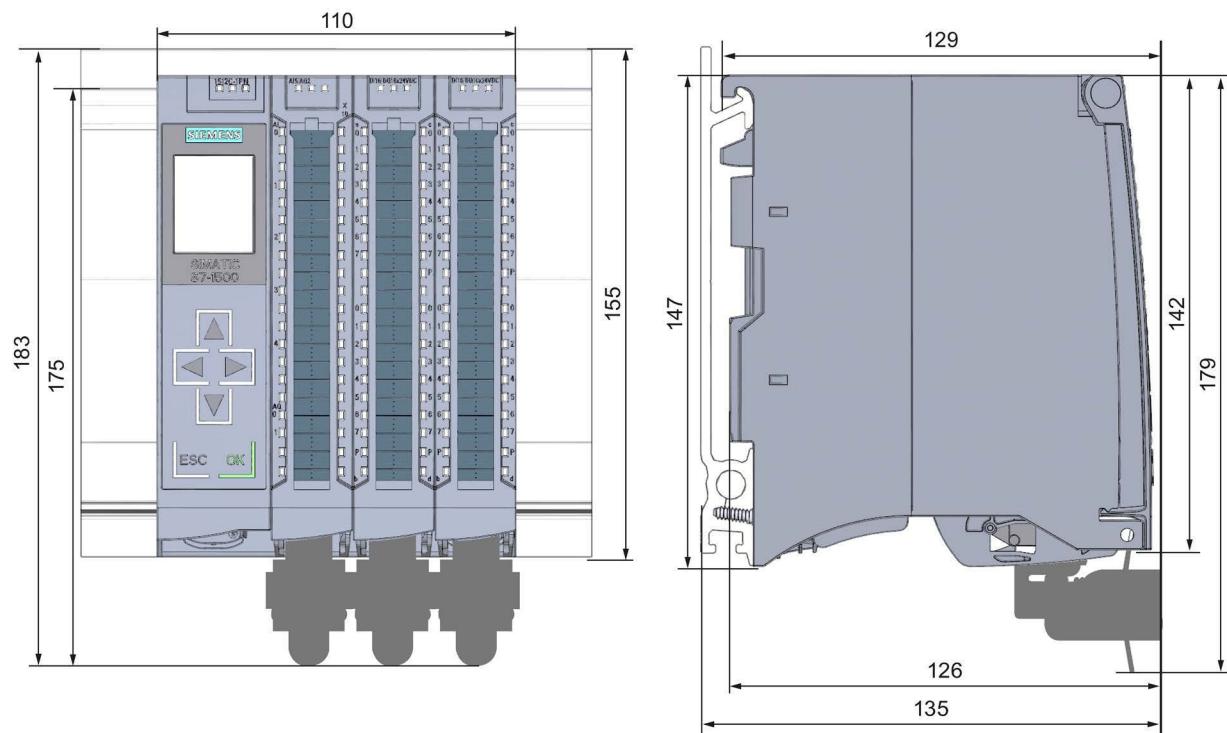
Dimension drawing of CPU 1512C-1 PN – front and side views
